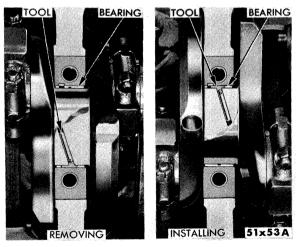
Removing and Installing Main Bearing Upper Shell
